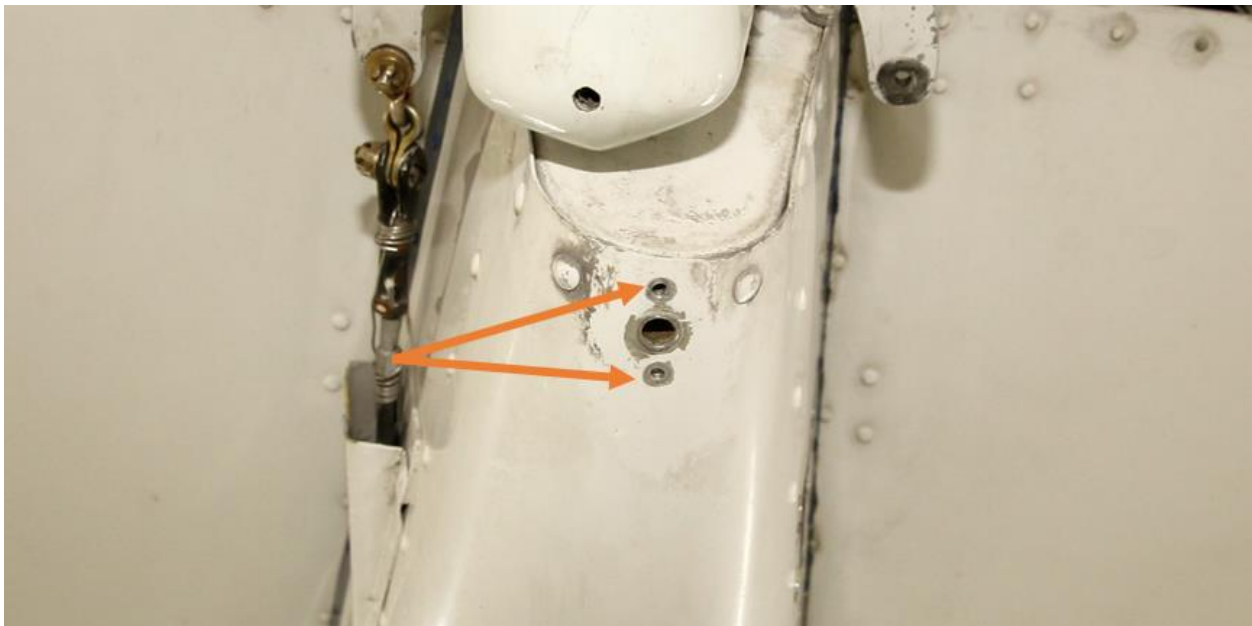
, Tie-Down Nutplate, Rivets Removed
